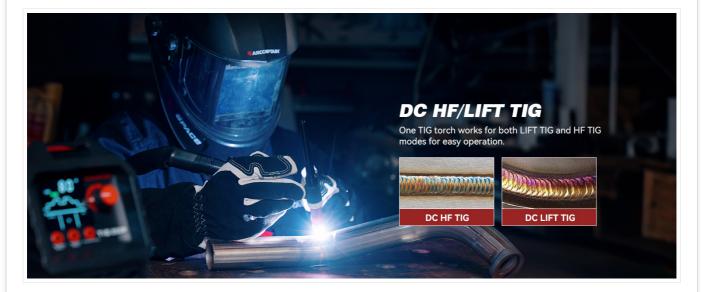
HF TIG welding in progress, showing the clean arc start and precise control.
